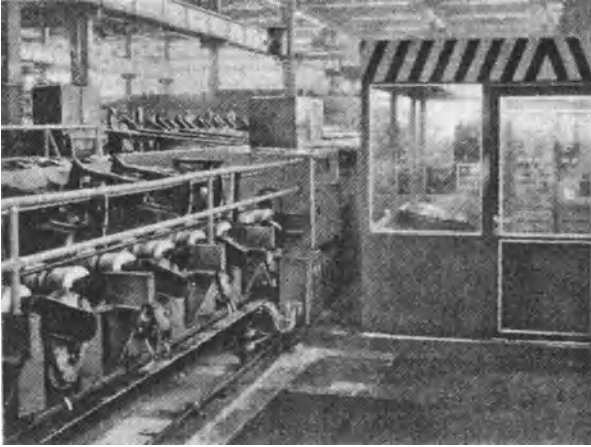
Tube tester for tubes up to 160 mm in diameter with spiral transport (design Deutsch, courtesy Mannesmann-Röhrenwerke, Solingen-Ohligs)
